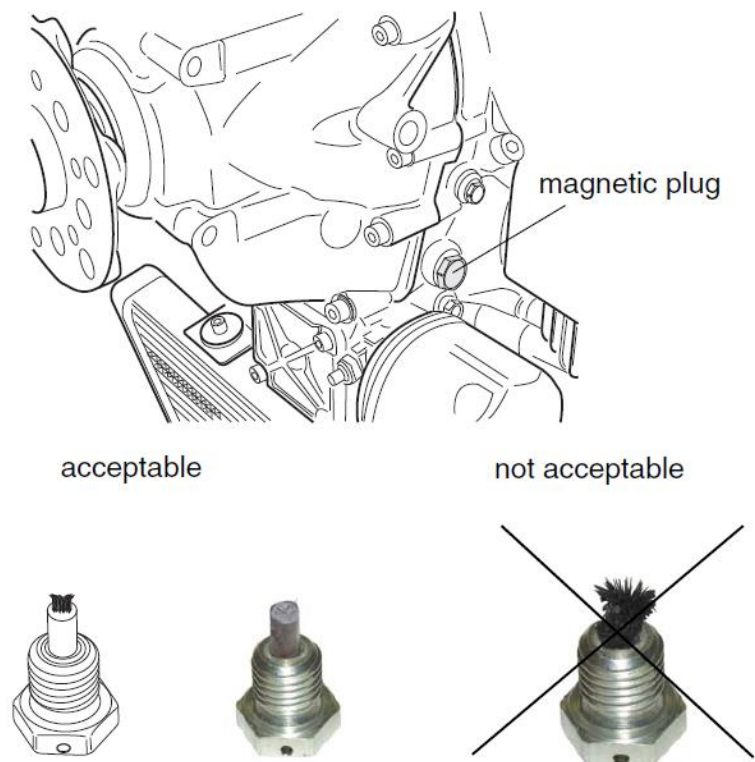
Rotax magnetic plug inspection findings guide
